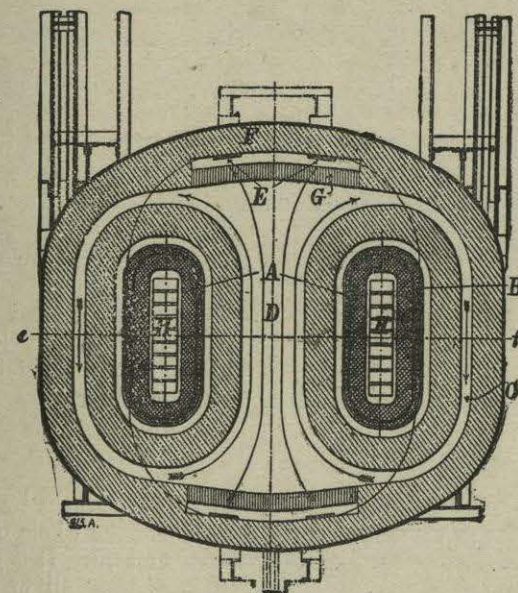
Sectional Plan of Röchling-Rodenhauser Furnace.
